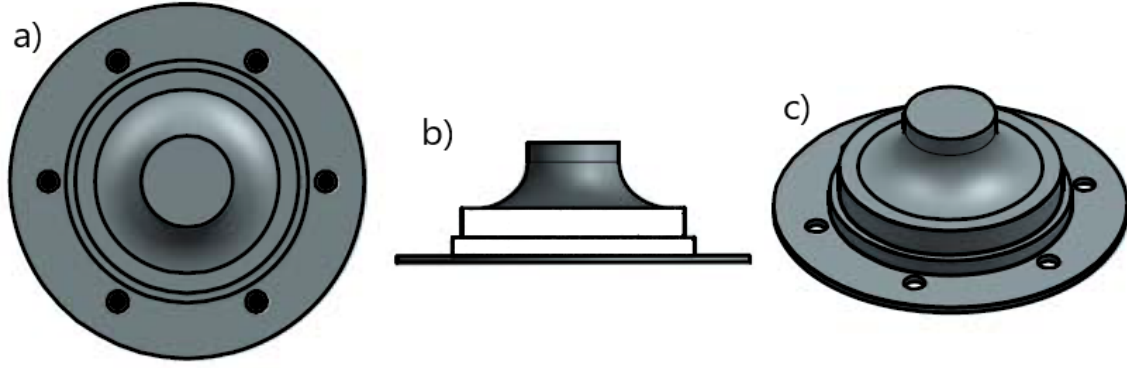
Radial RDE Nozzle. (a) Top View, (b) Side View, and (c) Isometric View.
